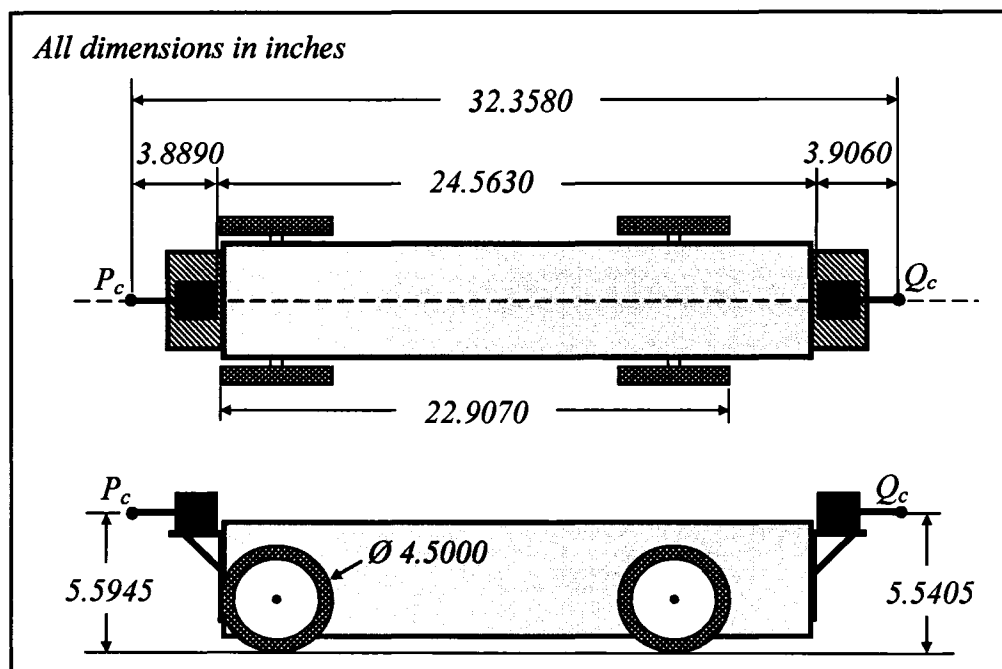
Dimensions of Robot Highlighting Camera/Laser Measuring Points
